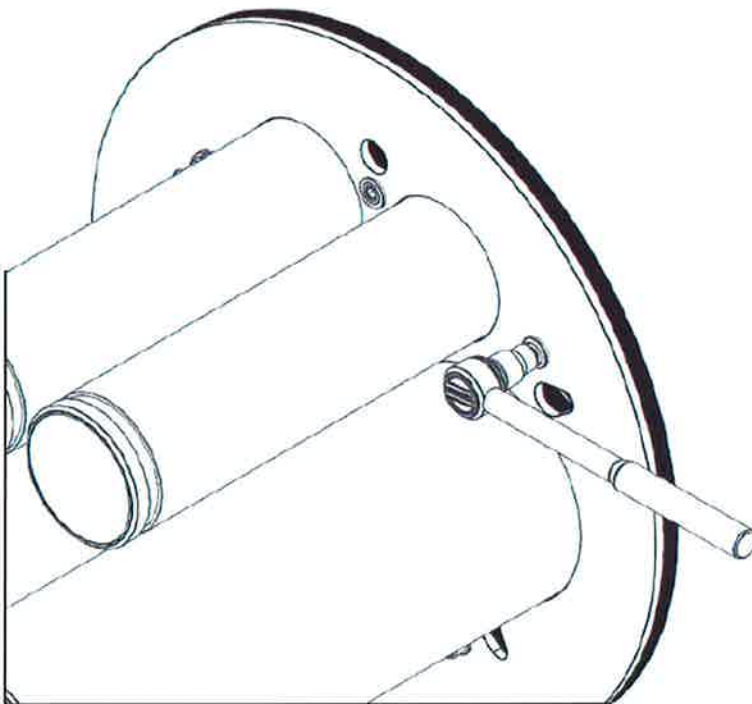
Tightening of the hex screws at the MSH-FW outer sealing element module 2 (picture of the manufacturer).
